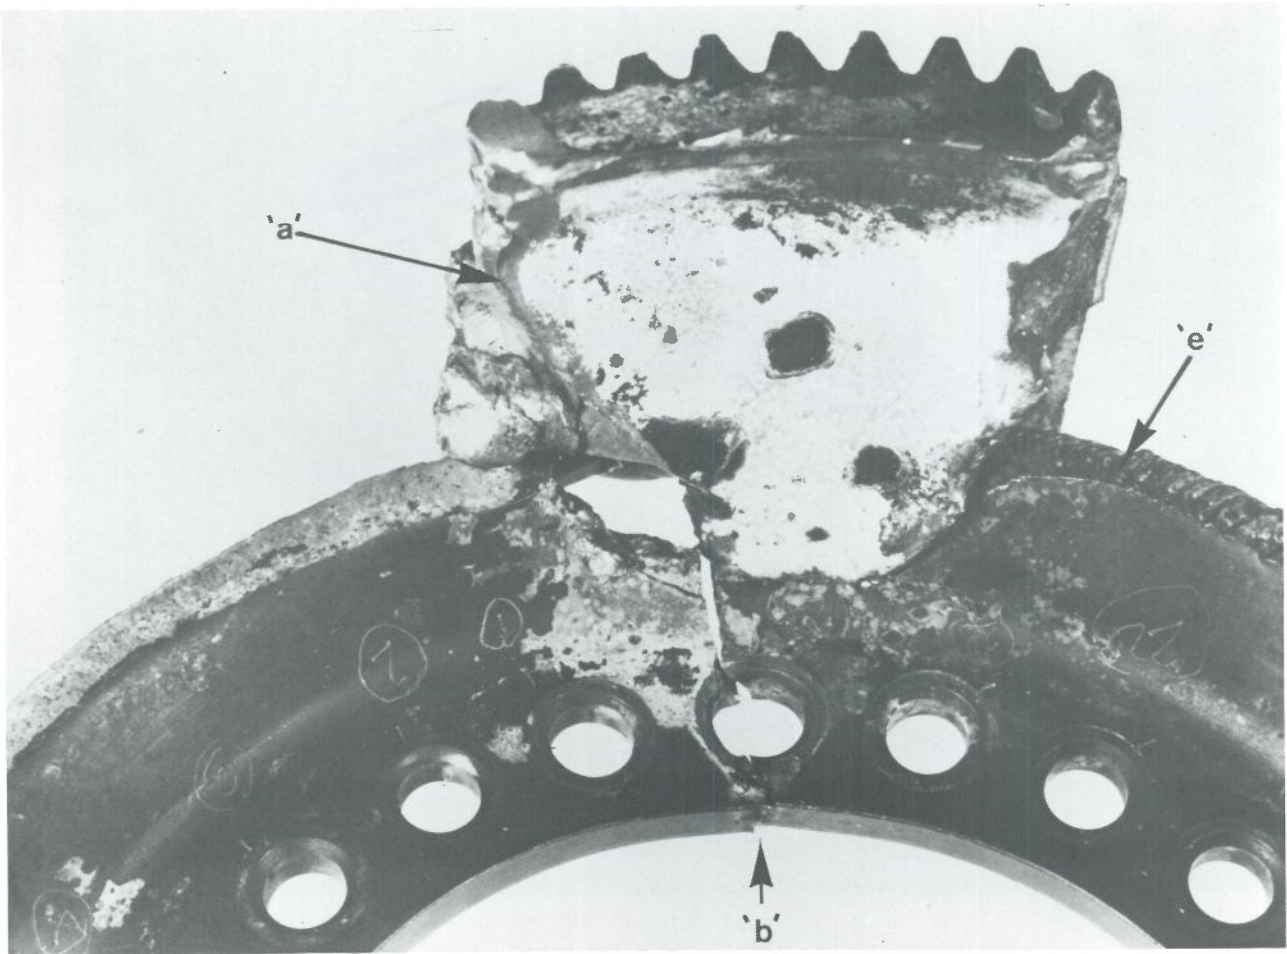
Showing position of fatigue evidence, 'a' and 'e', and crack through flange, 'b'
